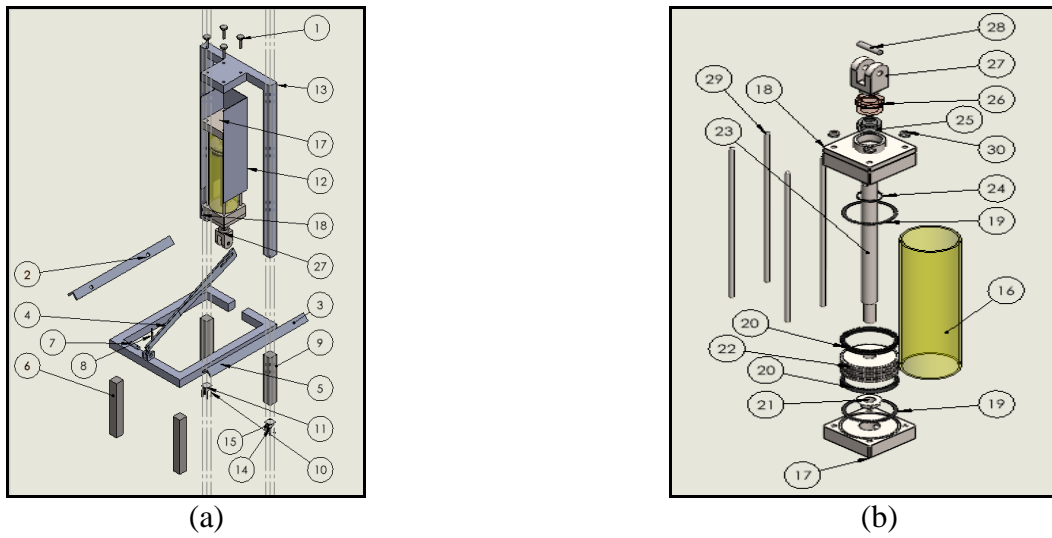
Exploded view of (a) pneumatic coconut cutter, (b) pneumatic system
